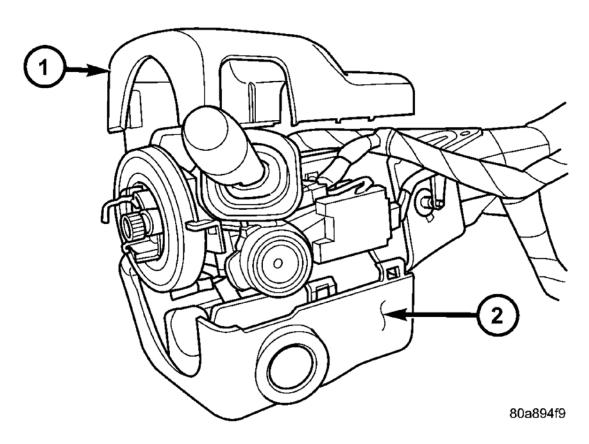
Removing/Installing Shroud Courtesy of CHRYSLER LLC
